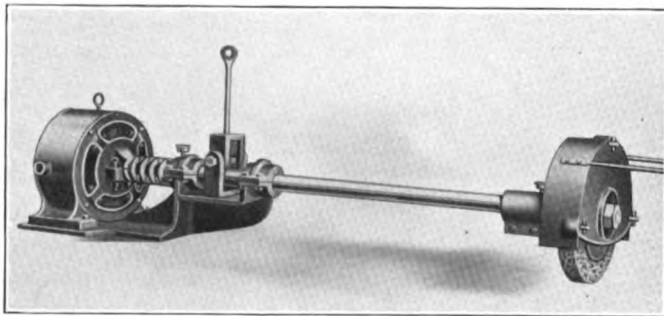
Hassel Grinder. Pittsburgh Steel Foundry Co., Pittsburgh, Pa.
